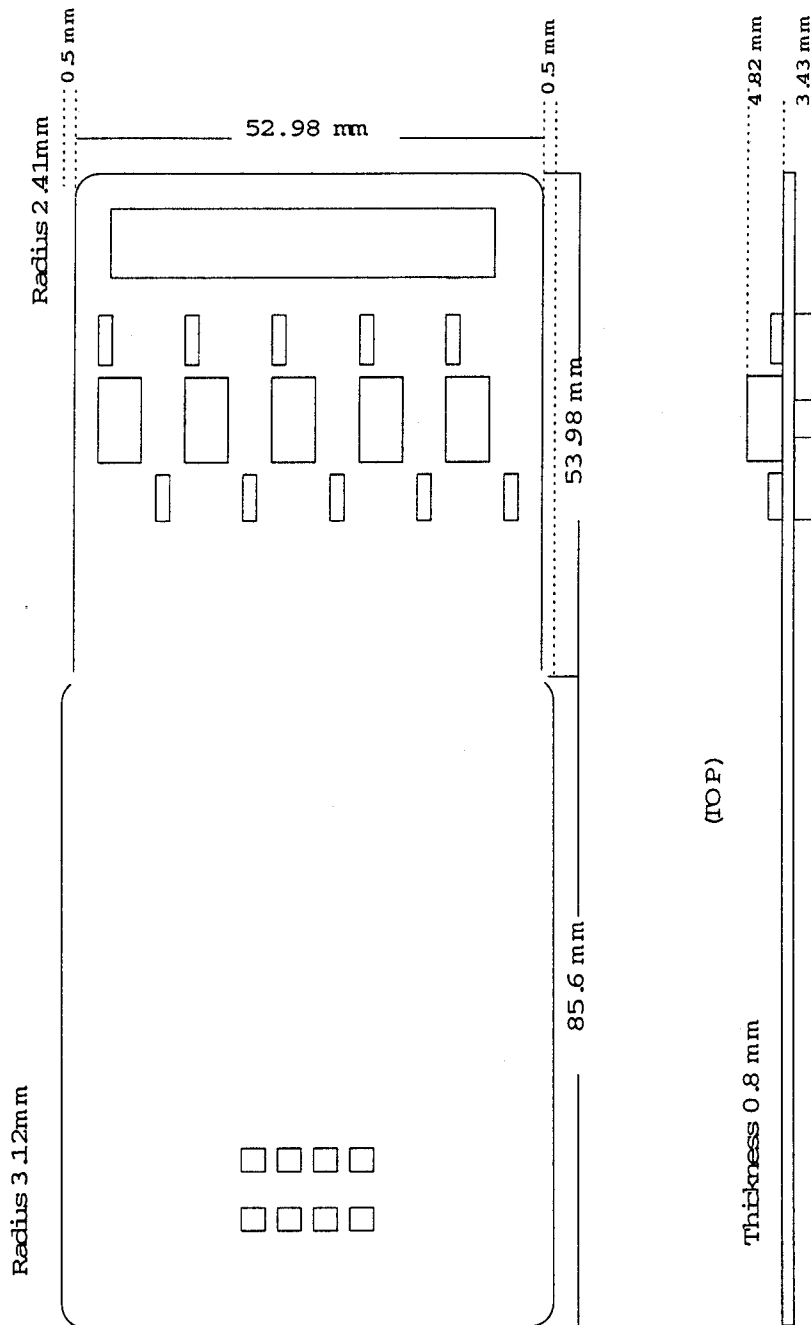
/ GSM 11.10 : Dimensions of Full Size Paddle.
